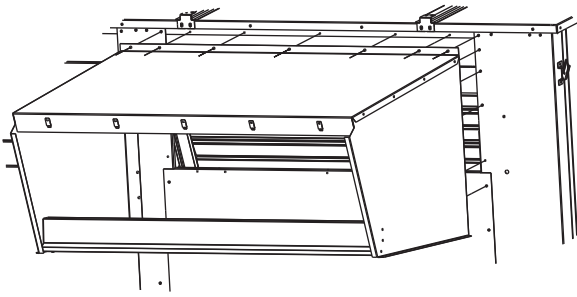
Removing Screws from the Outdoor Air Opening of Unit
